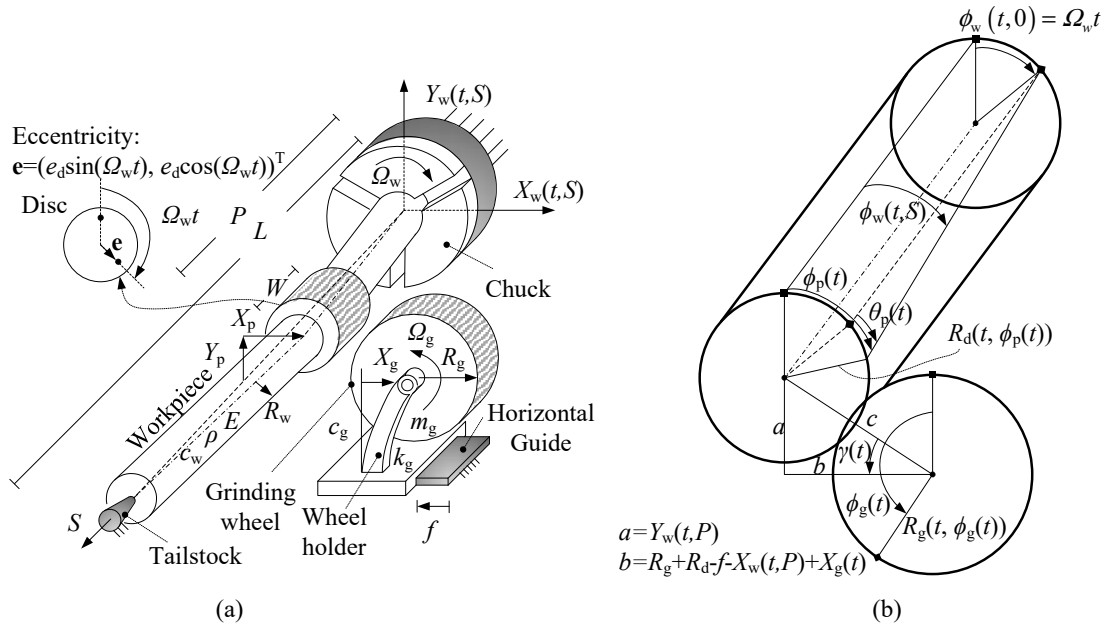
(a) Schematic of the regenerative grinding process with mass eccentricity in the workpiece; (b) wheel-workpiece contact angle $\gamma(t)$ introduced by vertical workpiece displacement.
